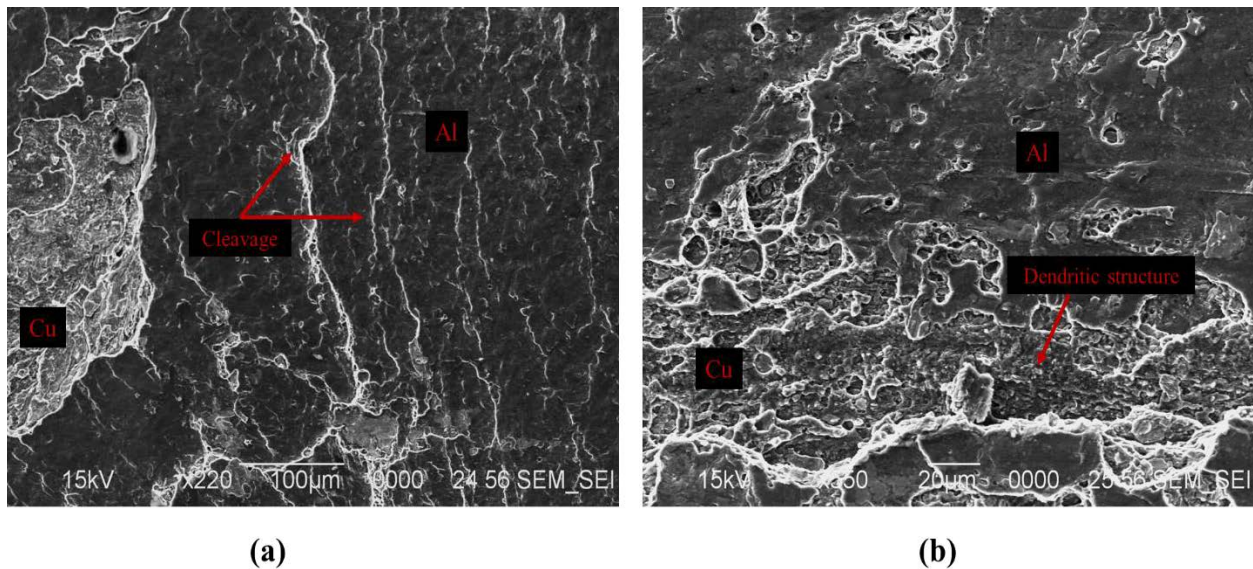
SEM image of fractured surface of (a) Aluminum and (b) Copper welded with Zn interlayer.
